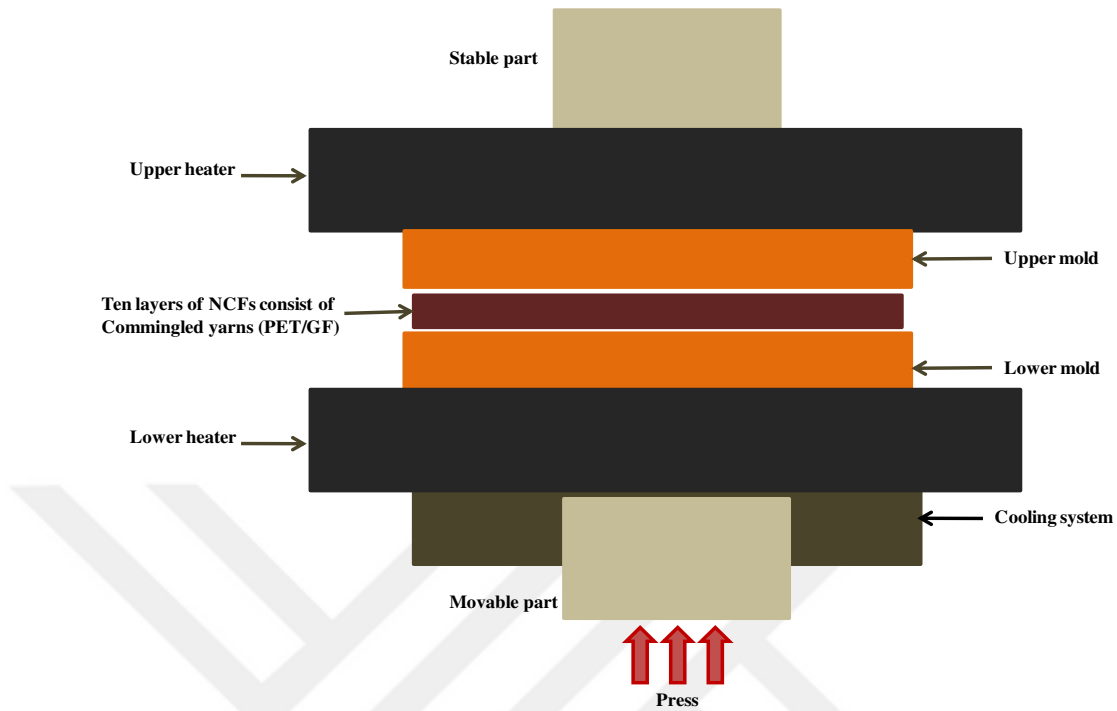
Schematic drawing of the hot press-machine which shows the main parts
